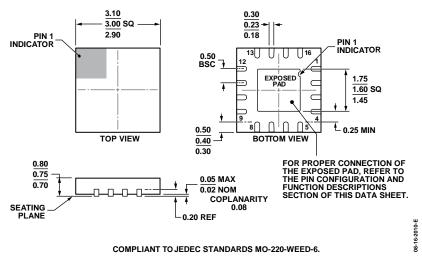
16-Lead Lead Frame Chip Scale Package [LFCSP\_WQ] 3 mm × 3 mm Body, Very Very Thin Quad (CP-16-22) Dimensions shown in millimeters
